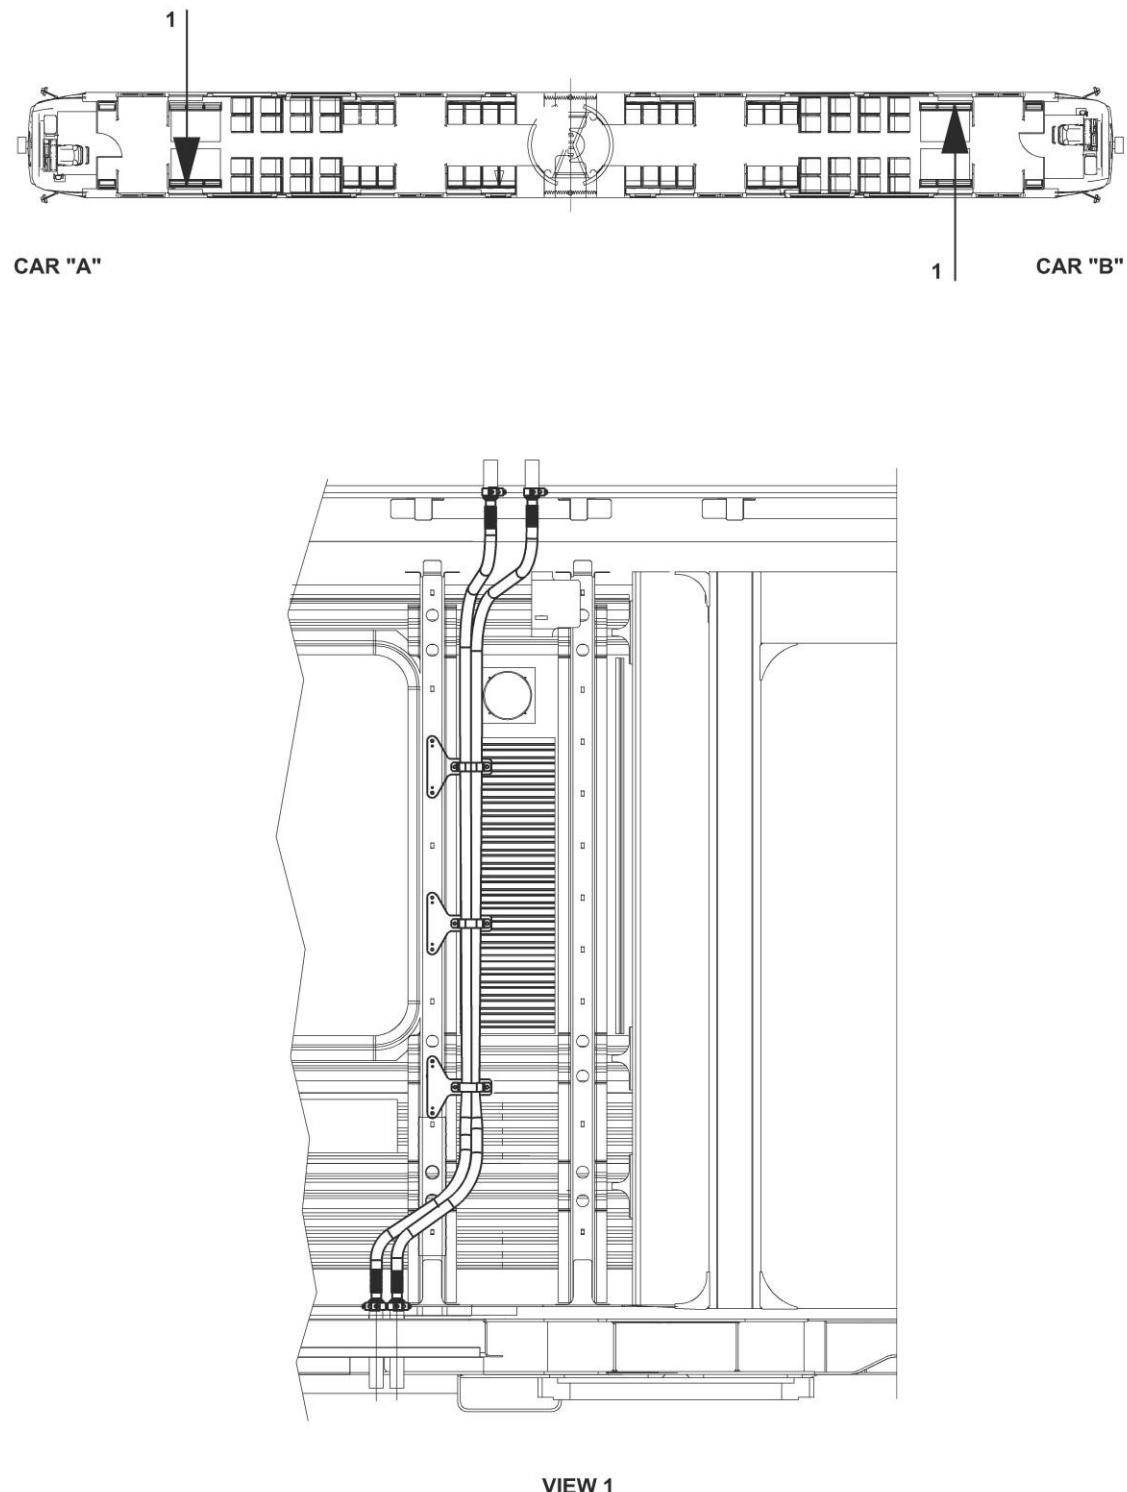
I-02.36 B Body section Underframe - HV Cabling Layout
